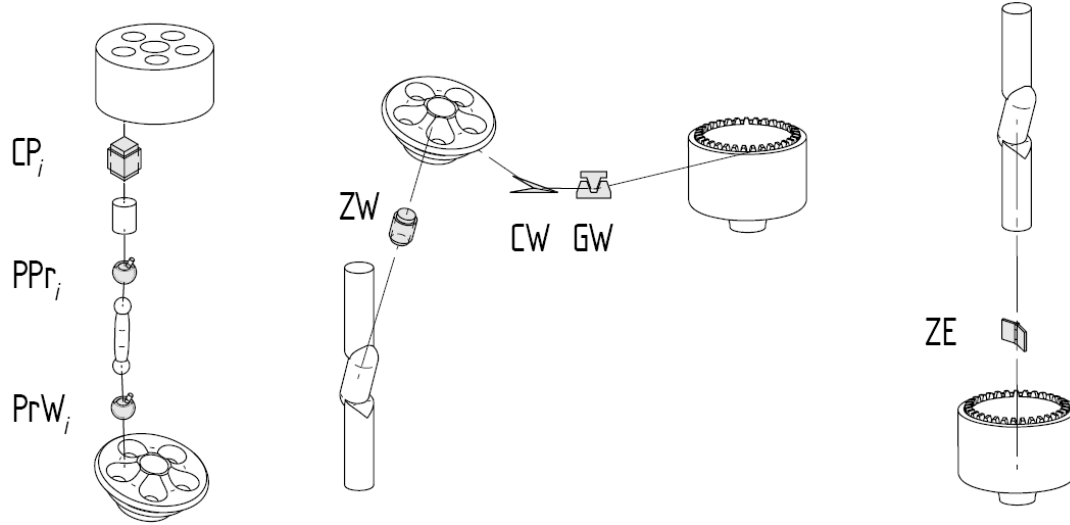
The joints connecting the integral parts of the machine: translational joint CP_i connecting the cylinder head and piston number i , ball joint PPr_i connecting piston number i and piston rod number i , ball joint PrW_i connecting piston rod number i and the wobble plate, cylindrical joint ZW connecting the Z-shaft and wobble plate, cone joint CW connecting the wobble plate and engine block, gear joint GW connecting the wobble plate and engine block, and revolute joint ZE connecting the Z-shaft and engine block.
